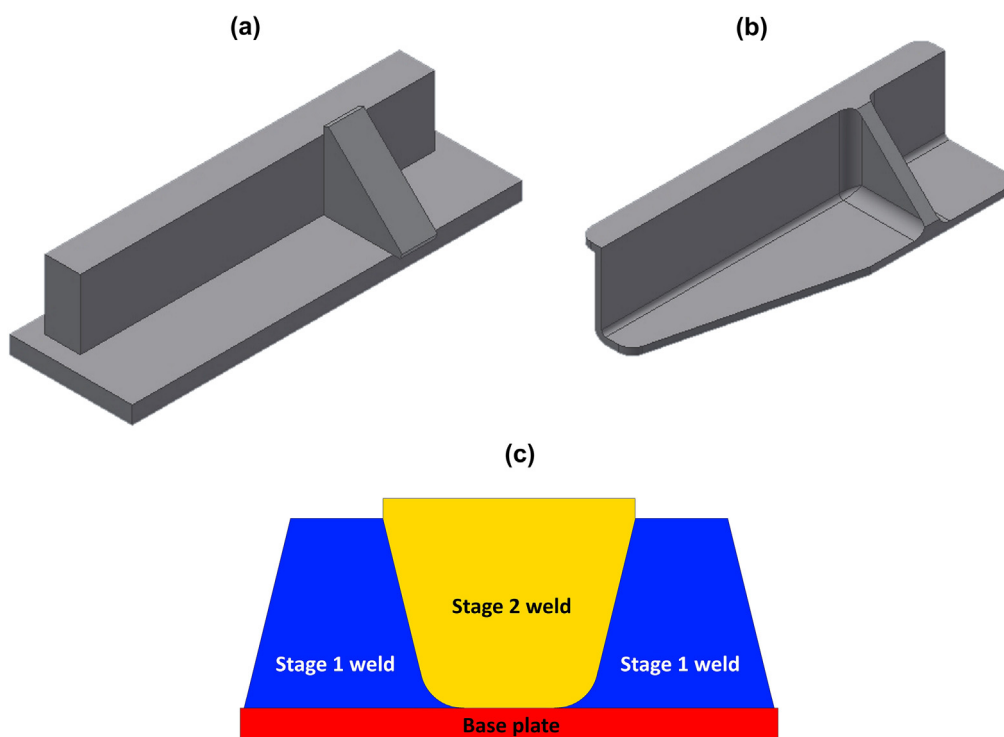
Linear friction welding of non-planar surfaces, showing: (a) an illustration of a preform, (b) an illustration of the component machined from (a), and (c) the manufacturing process of the “keystone” weld where the oscillations occur in and out of the viewing plane.
